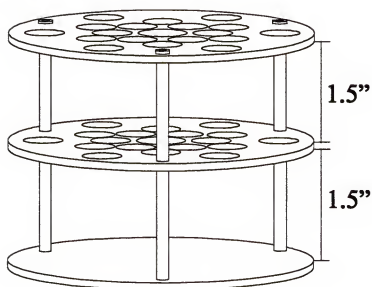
A side view of the wagon-wheel sample holder used in geometry A showing the spacing between plates.
